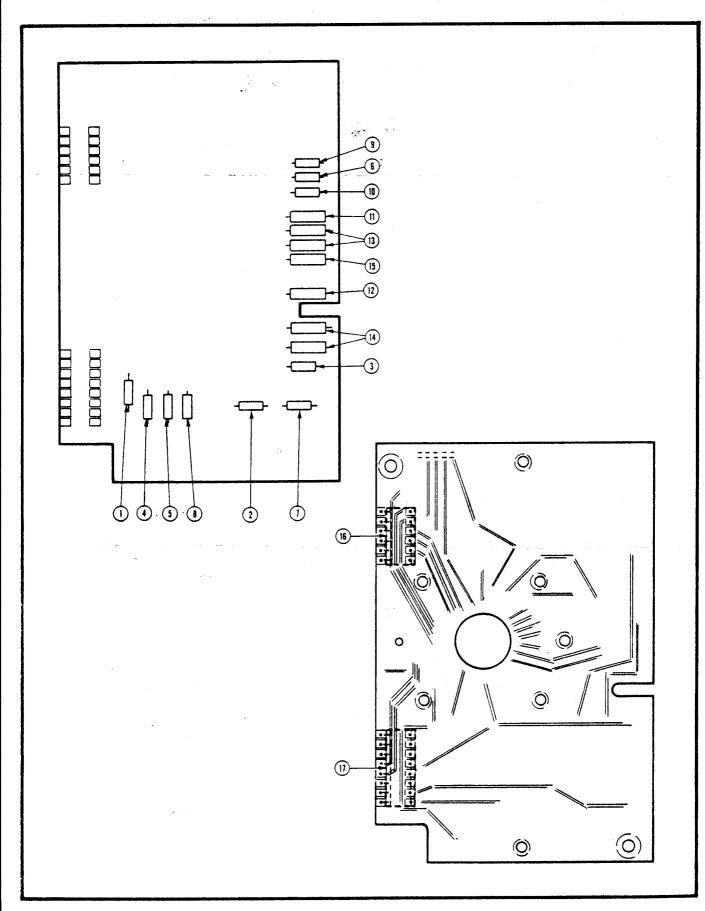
A9 Circuit Board Assembly, A Timing (sheet 1 of 2).
